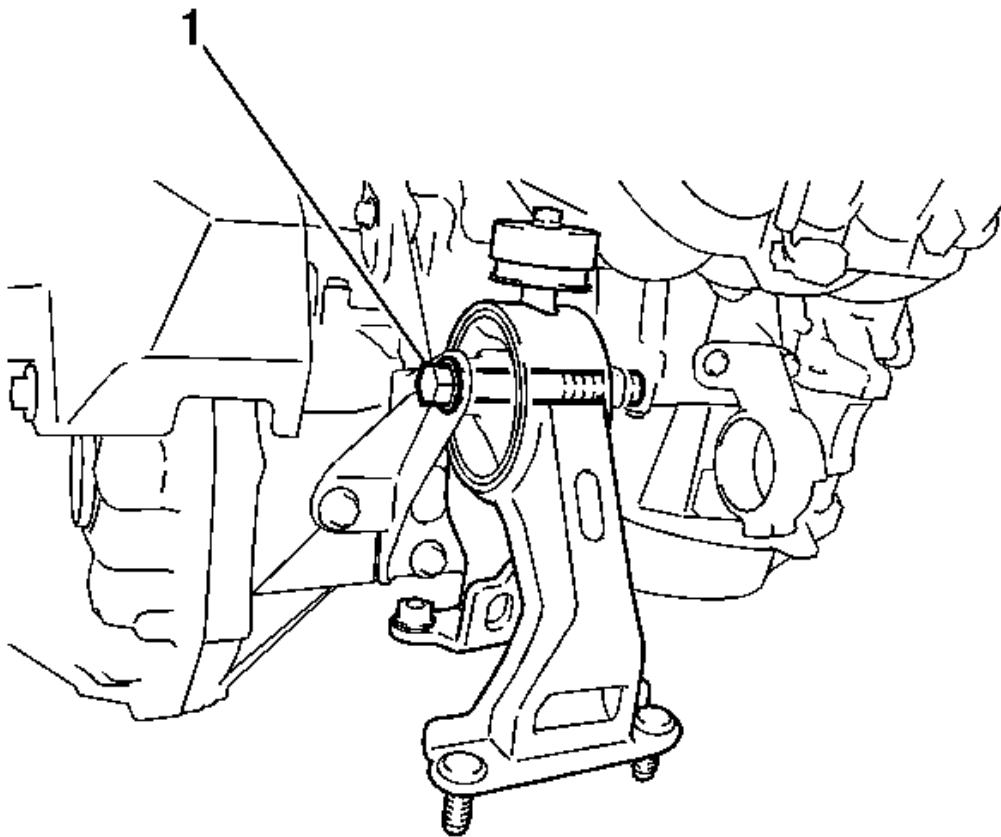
Identifying Rear Engine Mounting Insulator Through Bolt - 2WD
